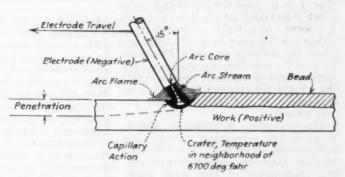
DIAGRAM OF WELDING PROCESS WITH METALLIC ARC
